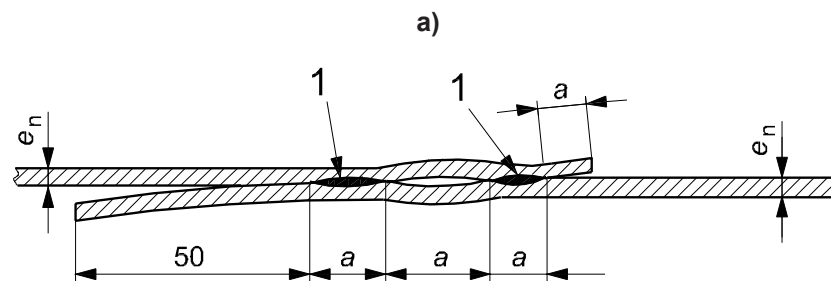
Test piece for lining membranes - Lap seam without testing channel
